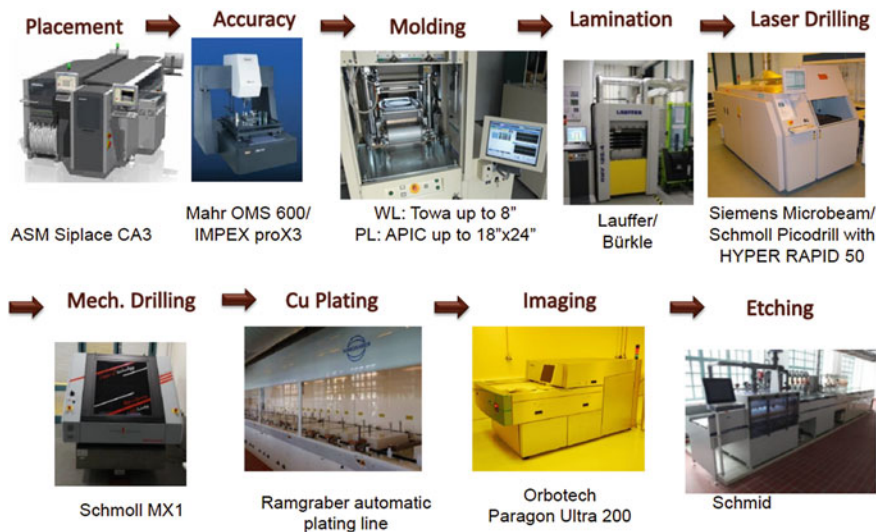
Fraunhofer IZM’s fan-out panel-level packaging (FOPLP) integration line
